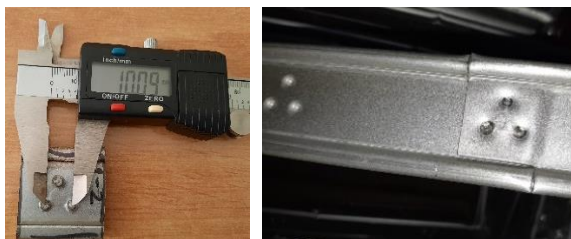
Measurement of spot distance and detail on the projection welded sample
